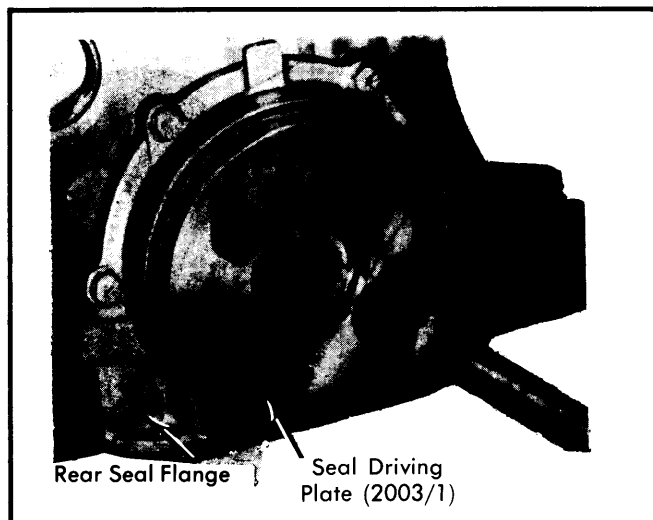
Using Special Tool to Install Rear Main Oil Seal
